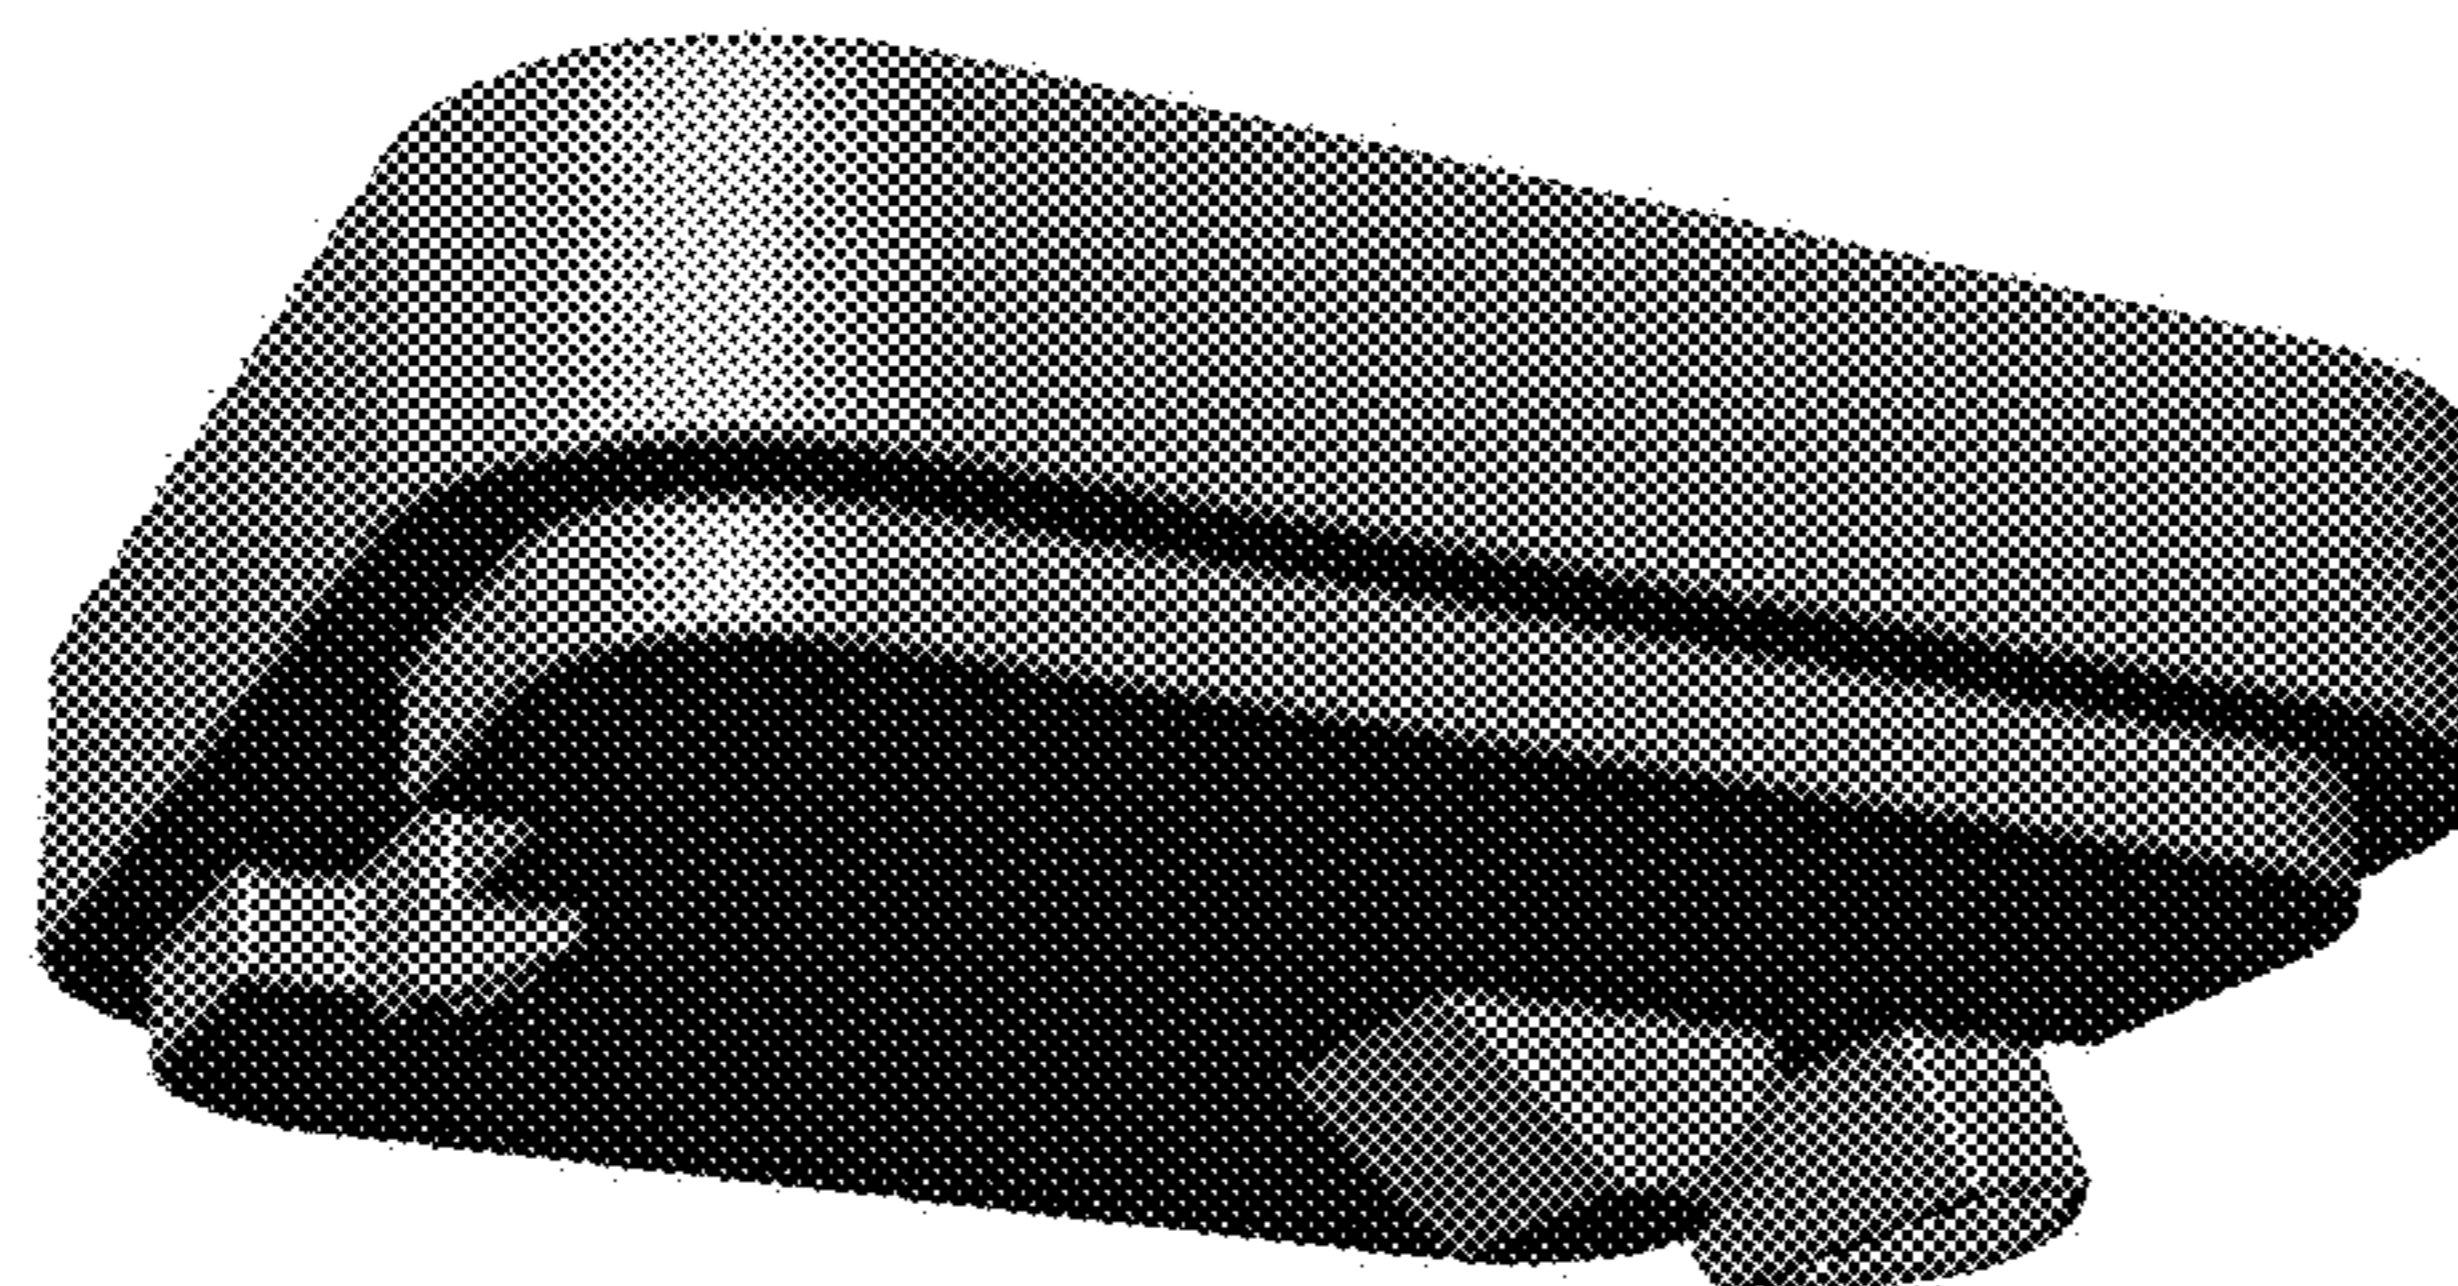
is a top view of the embodiment shown in of FIG. 1; FIG. 8 is a bottom-perspective view of the present invention showing another embodiment of an optical navigation device component;
